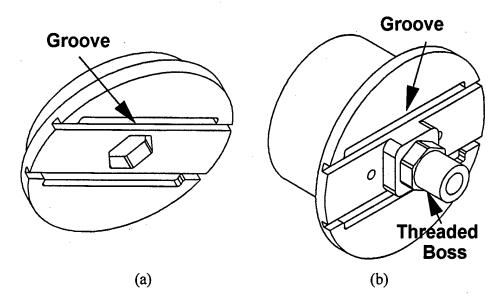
<u>Uppermost Blade Guide and the Lowermost Blade Guide</u>.
